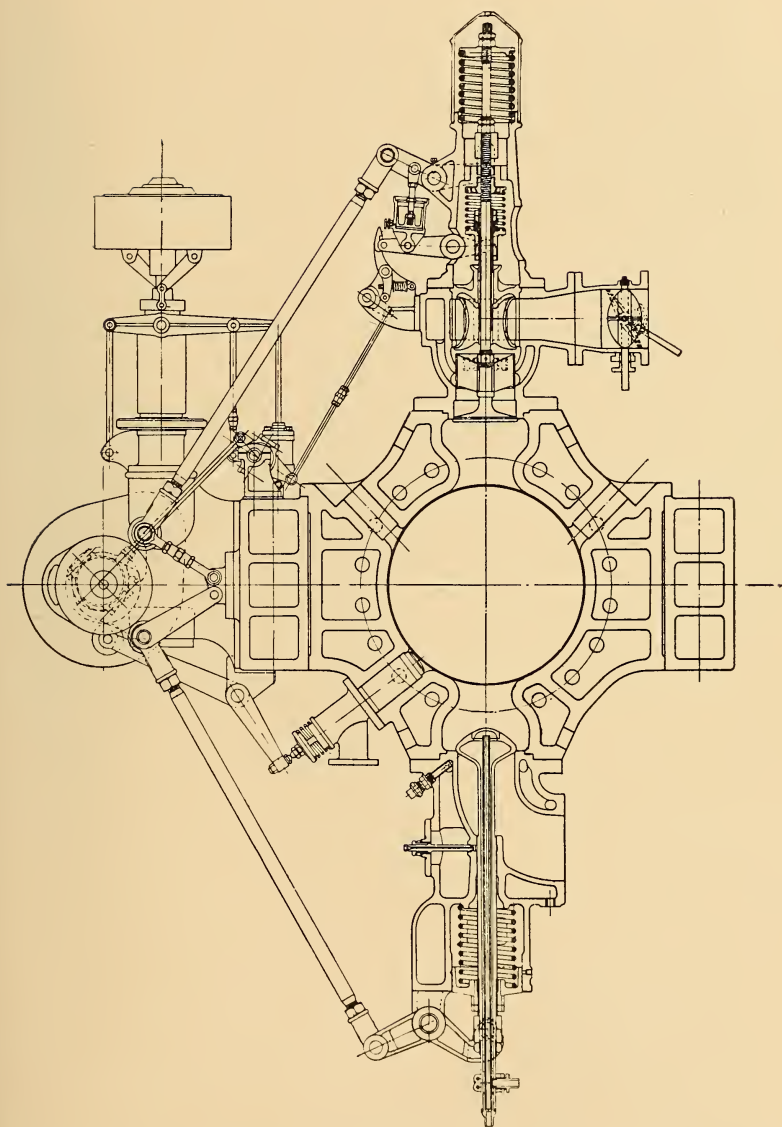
Arrangement of Valve Gear for Cockerill Engines (Richardsons, Westgarth and Co.). Note position of cam shaft for actuating inlet and outlet mushroom valves.
